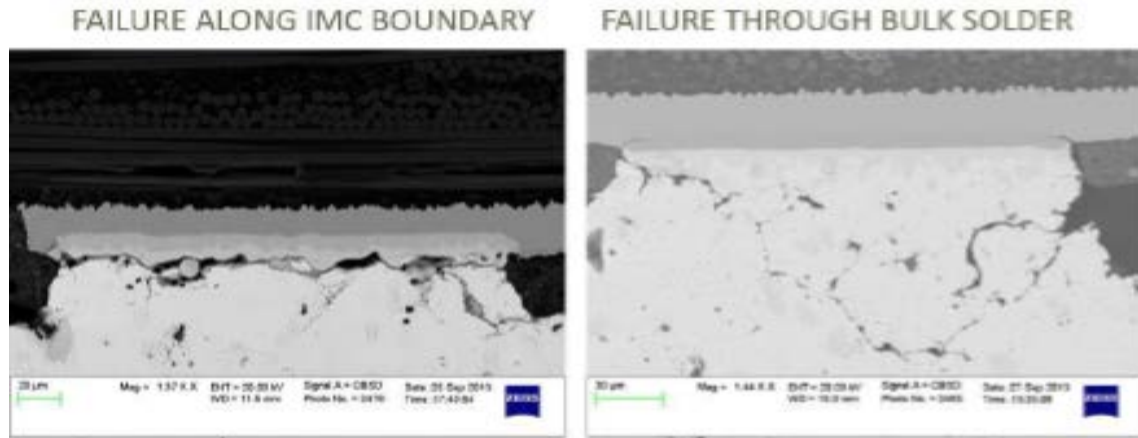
Solder joint failure mode for BGA packages [45]
